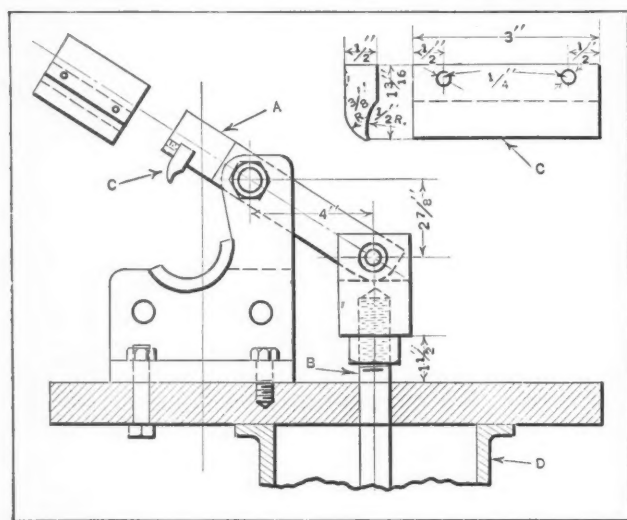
End View of Hose-splitting Device Shown in Fig. 2
